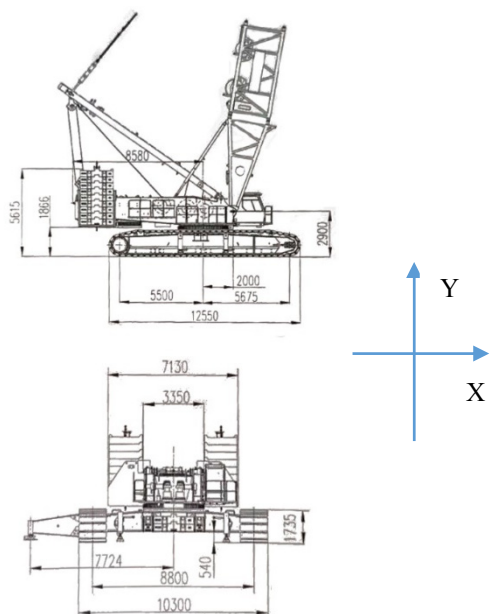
Geometric dimension data of side steel structure of the crawler crane
